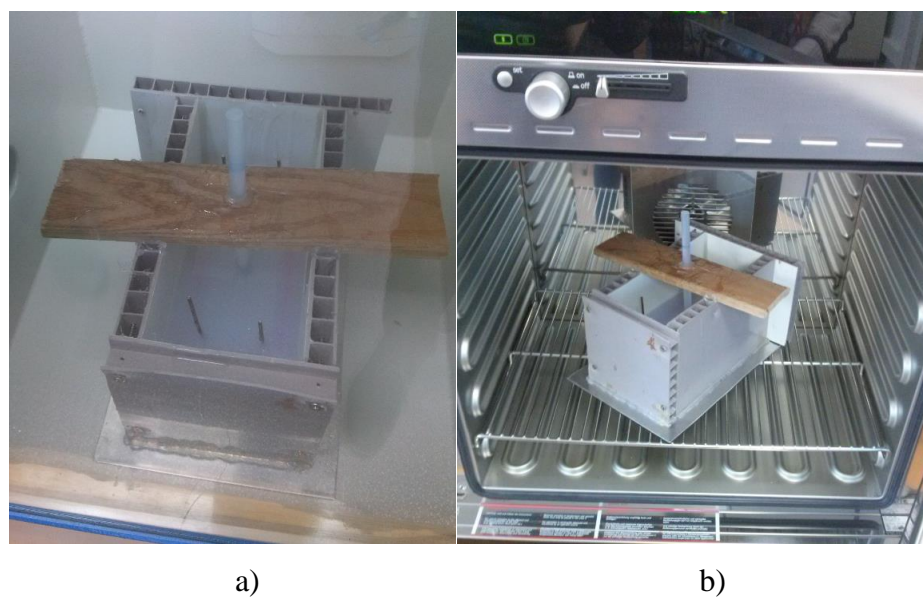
Silicone mold box: a) under vacuum; b) placed in the oven.
